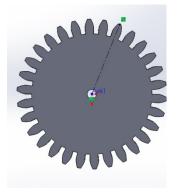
Solidworks Model of Gear B Table 3.3- Specifications of Gear B
